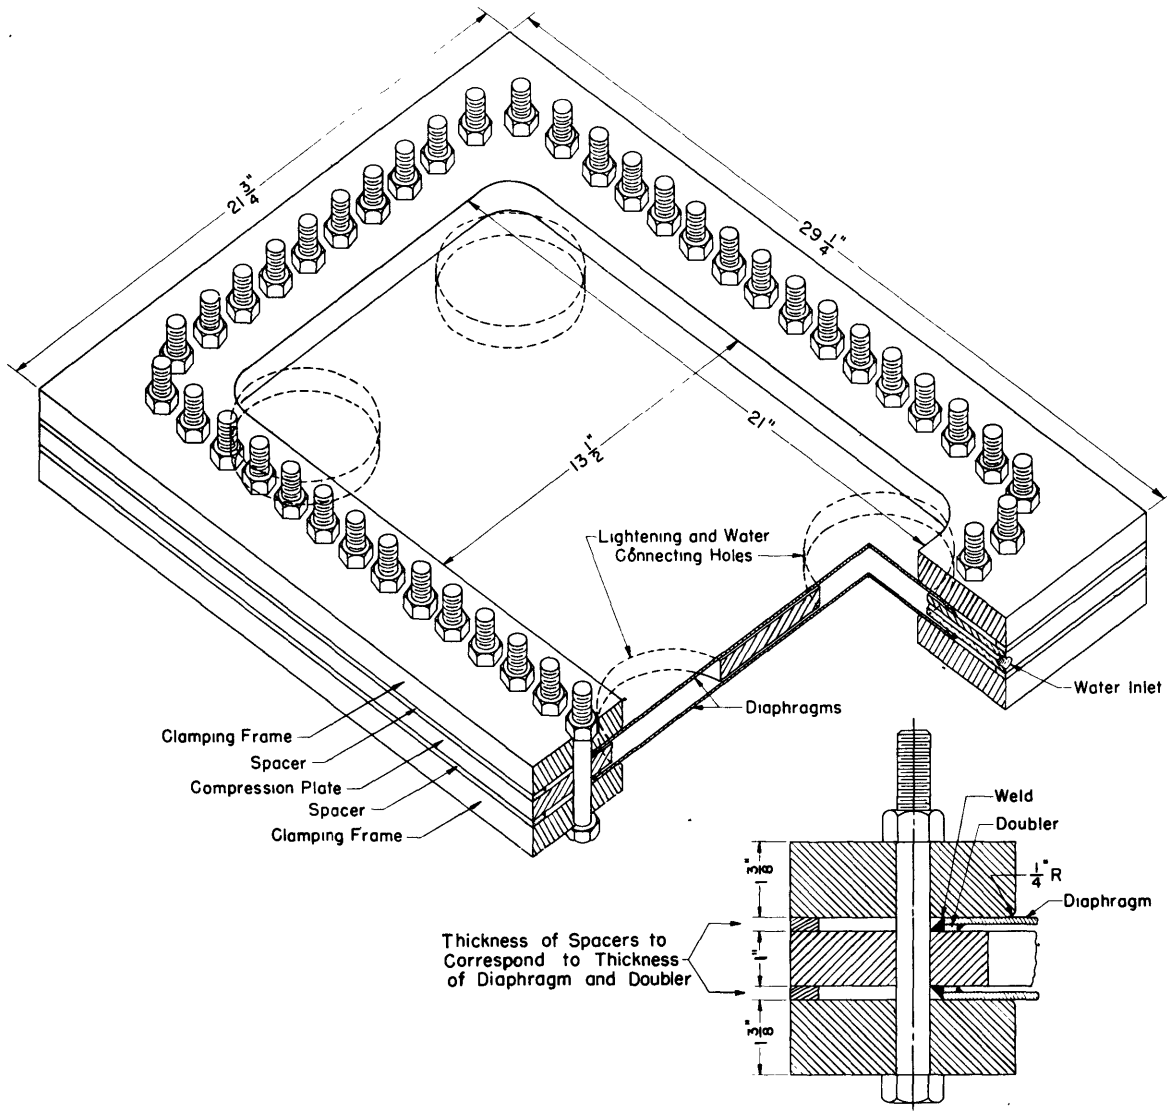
Isometric and Sectional Sketch of Test Assembly
